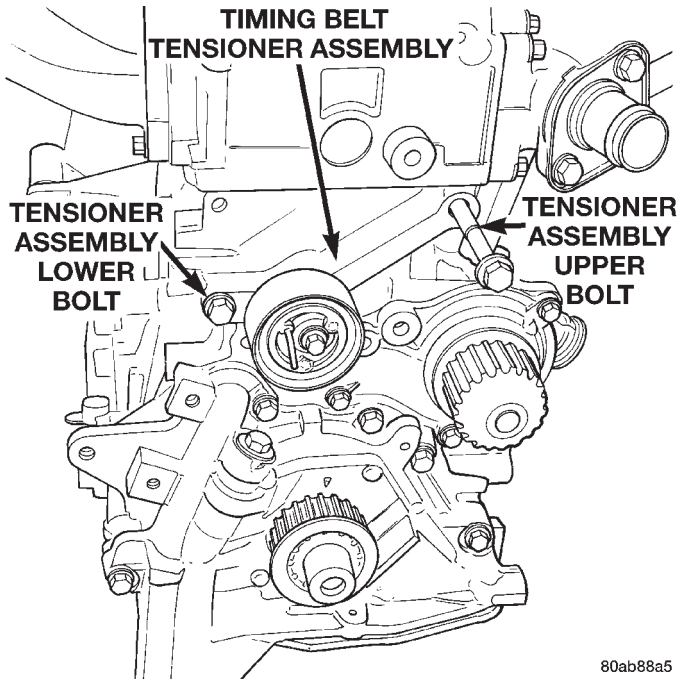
Timing Belt Tensioner Assembly—Removal/Installation
